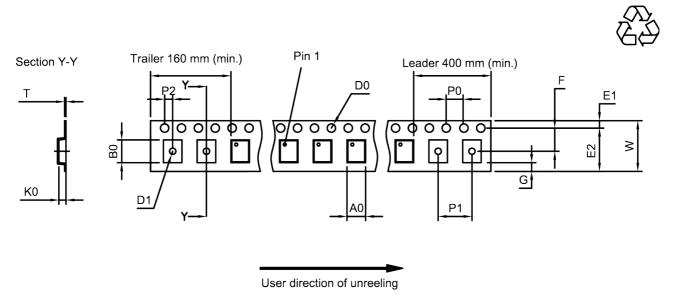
Drawing of tape (first-angle projection) for illustration only and not to scale. The valid tape dimensions are listed in Table 1.
